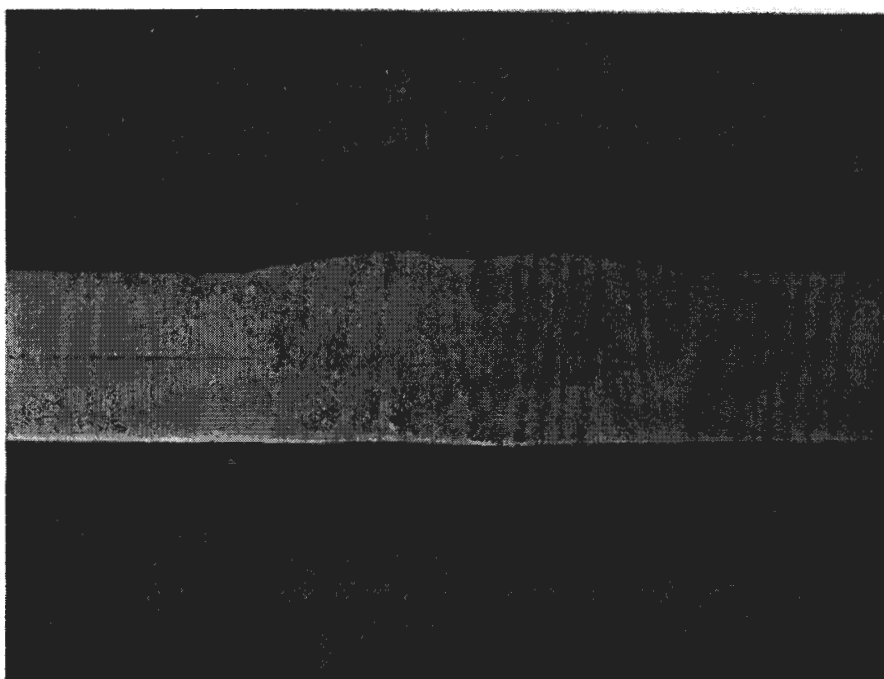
Macrograph of a typical improved plug weld tensile shear specimen; magnified 9×, etchant: 1% nital.
